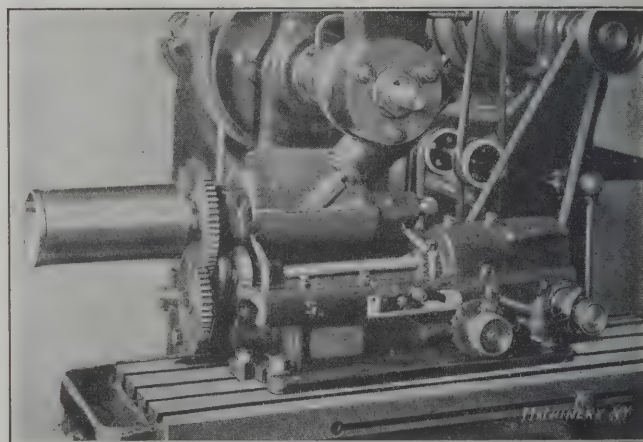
Milling the Spindle Driving Worm in a Completely Automatic Attachment for the Plain Milling Machine
